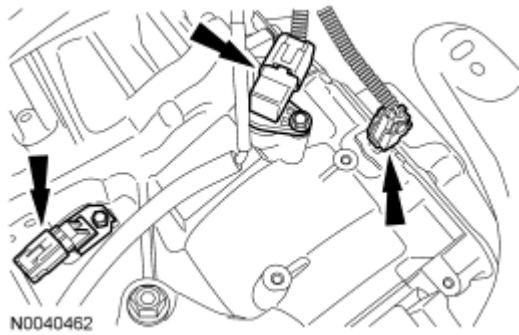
Locating Turbine Shaft Speed (TSS) Sensor, Intermediate Shaft Speed Sensor And 5Th Gear Valve Body Electrical Connector
